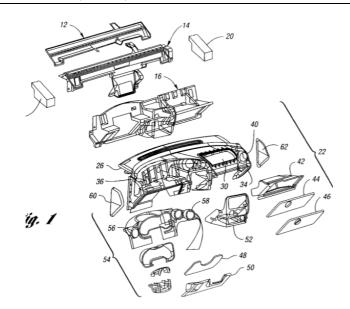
an exploded view of the cockpit assembly with both the CCB assembly and the IP assembly (Haba and Truman 2001)
